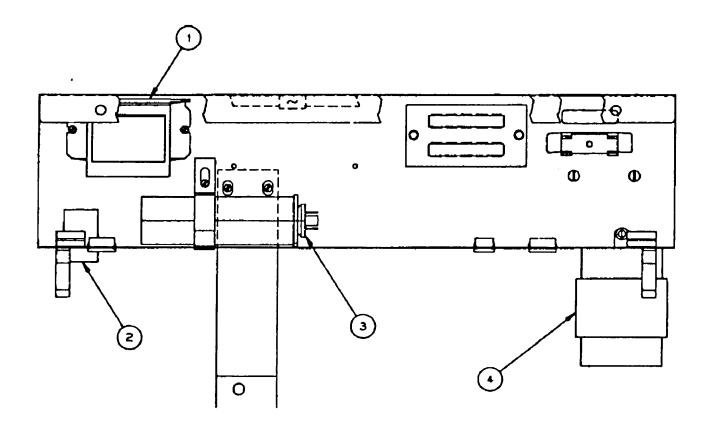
EXPLODED VIEW & PARTS LIST DB90-BC ELECTRIC BOX ASSEMBLY
